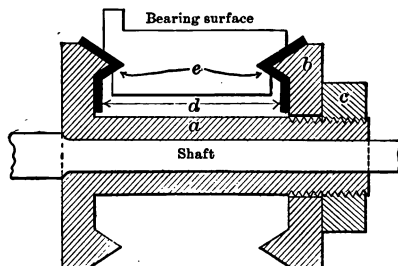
Cross-section of a Small Commutator, Showing the More Essential Parts of the Assembly. General Electric Co.
